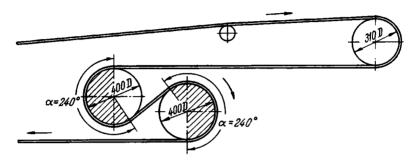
Method of passing belt round drive pulley in PTY-30 (RTU-30) conveyor drive head
